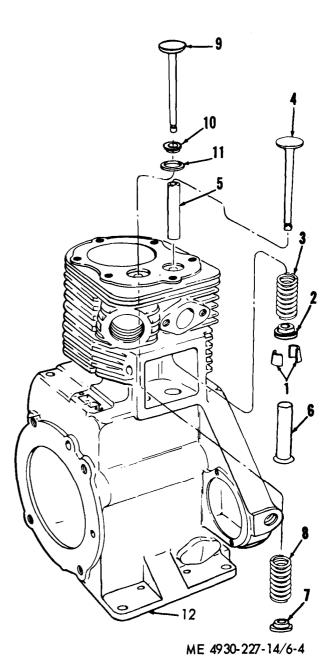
Valves, removal, disassembly, reassembly and installation.
